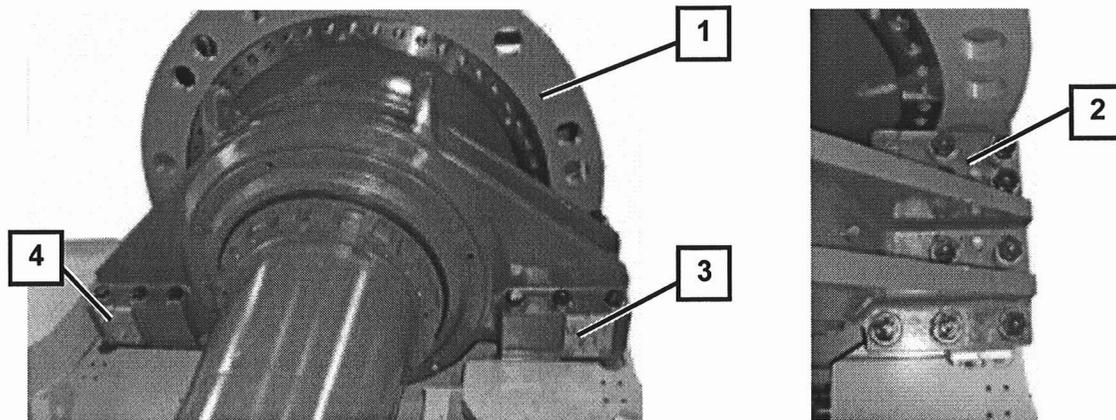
Rotor shaft with rotor lock disk (WT of turbine class K07)
